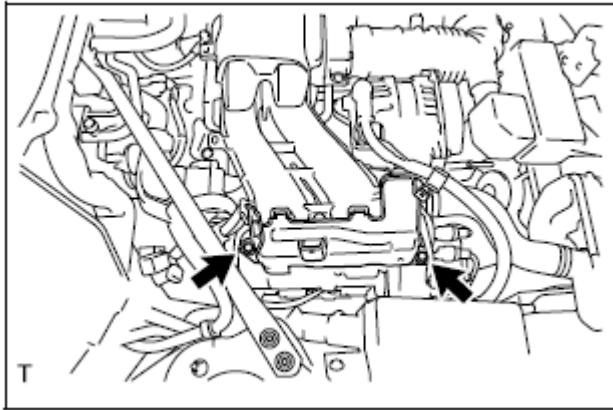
Identifying Intake Manifold Protector Mounting Bolts (Bank 1 Side)
